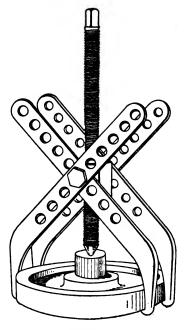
Combination Gear and Wheel Puller Premier Electric Company, Chicago
